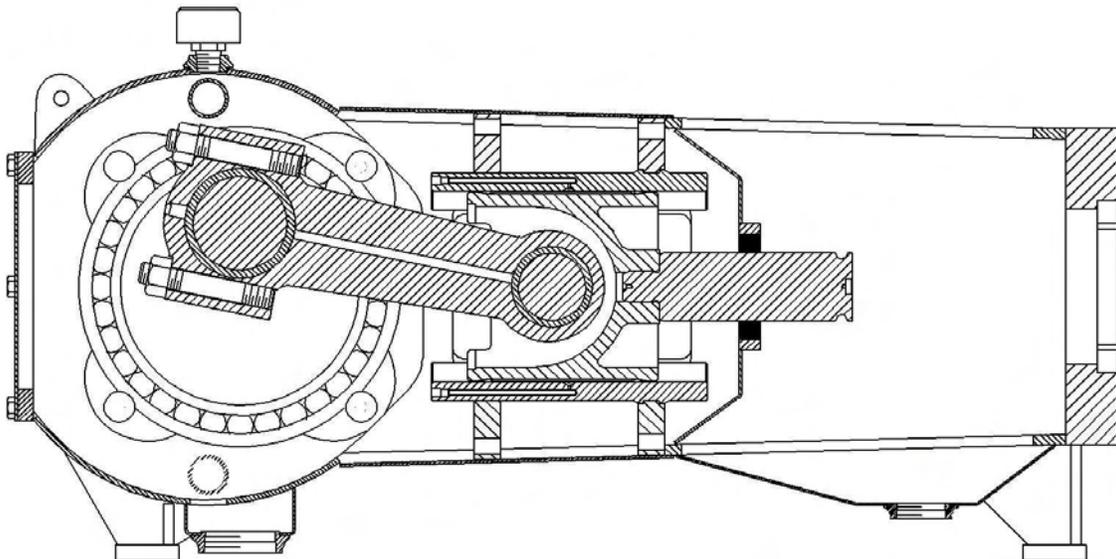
OPI-600 POWER END CROSS SECTION
